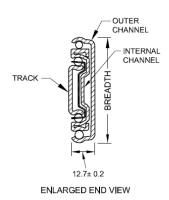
TYPICAL SKETCH OF TELESCOPIC BALL BEARING SLIDE
